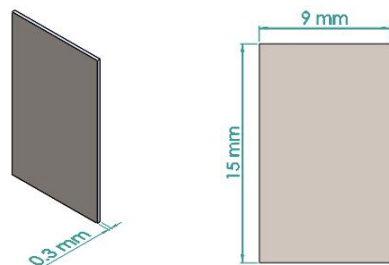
Dimensions of electrical resistance sensor electrodes a) side view b) front view.
